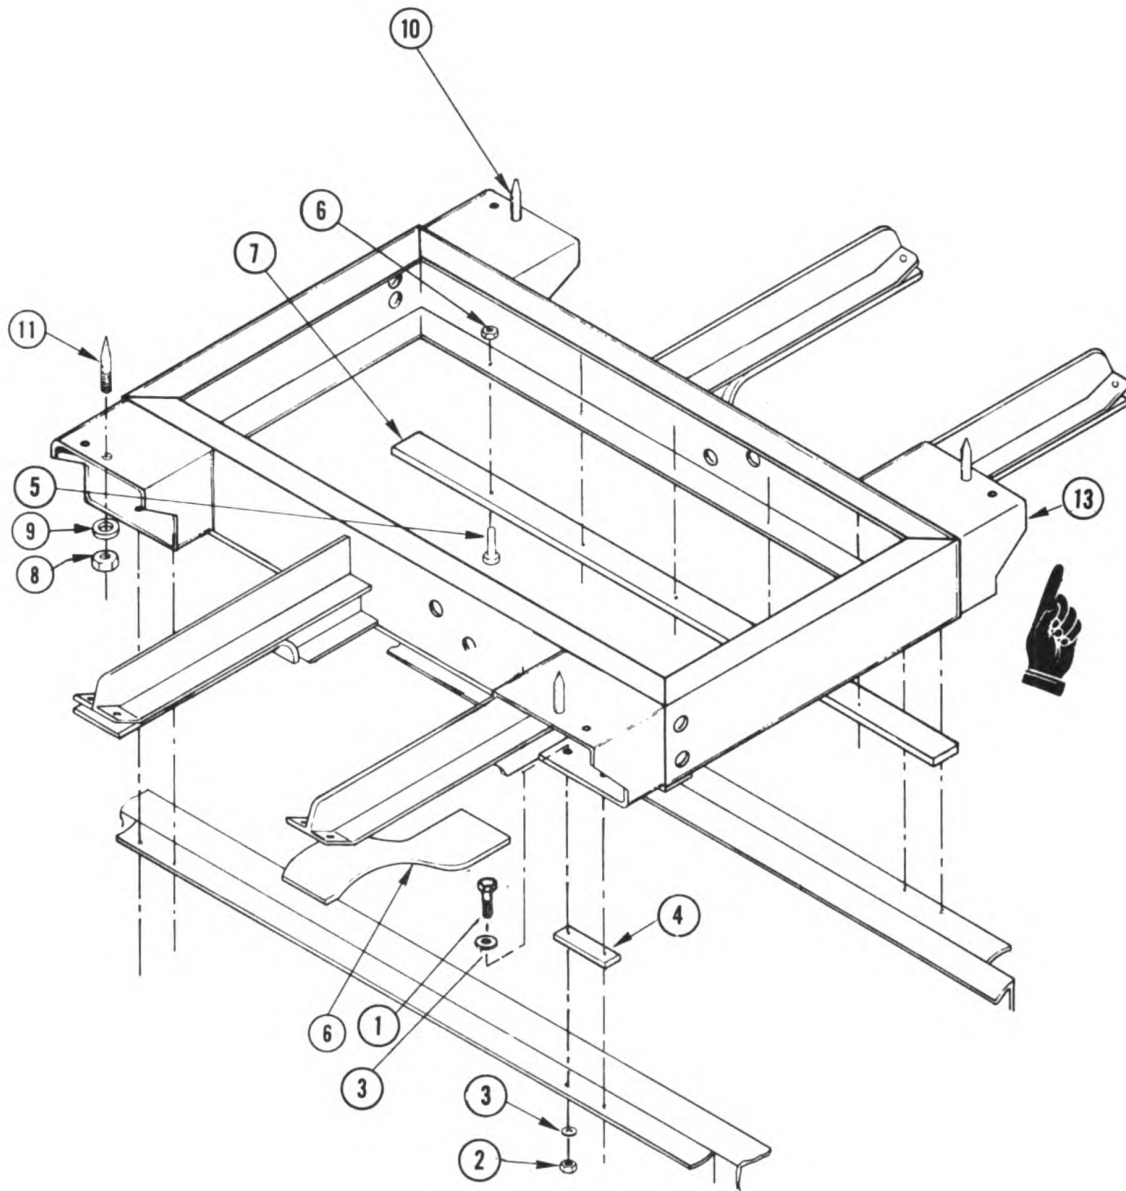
Generator Mounting Frames (Sheet 1 of 2)
